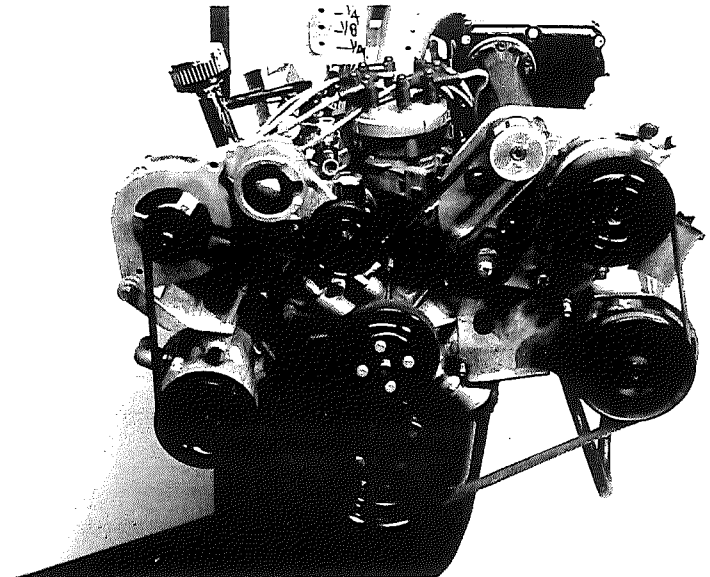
BELT TENSION ADJUSTMENT (STOCK TENSIONER)
